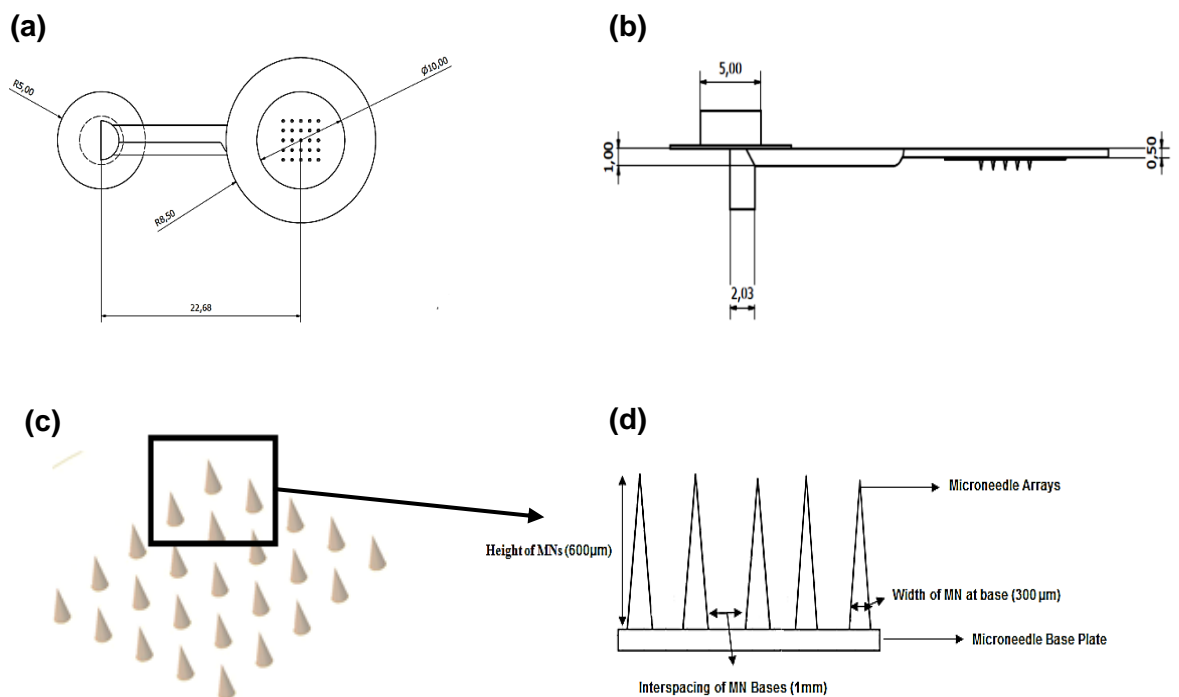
(a) 2D-view of the MN part with dimensions (b) side-view of the part with dimensions; (c) schematic representation of a microneedle array (d) schematic representation of a microneedle array showing its geometrical parameters like height of MNs in array, interspacing of MN bases and width of MN at base.
